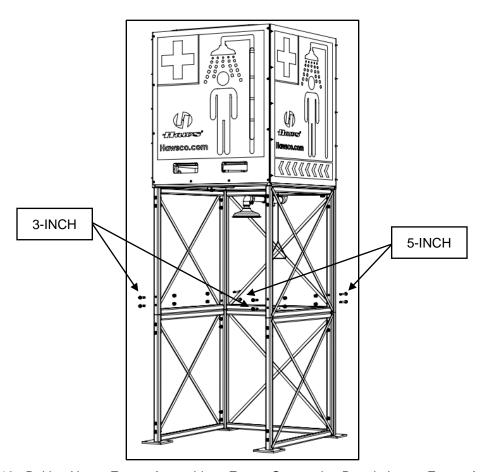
Bolting Upper Frame Assembly to Frame Connection Bars in Lower Frame Assembly
